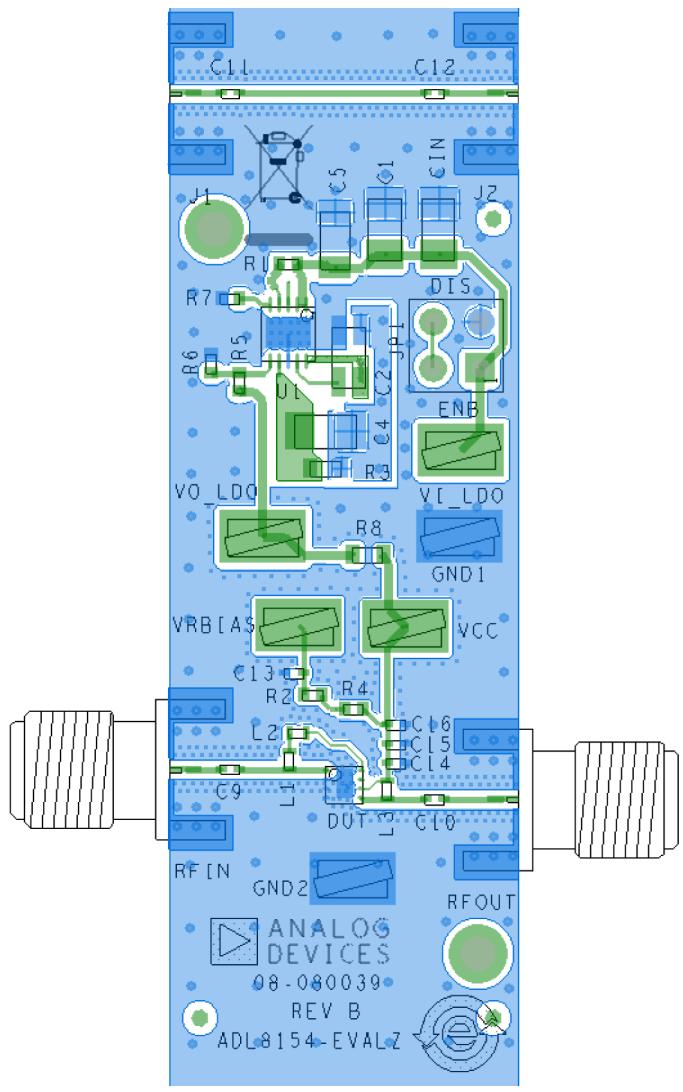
ADL8154-EVALZ Assembly Drawing (J1, J2, C11, and C12 Not Installed)
